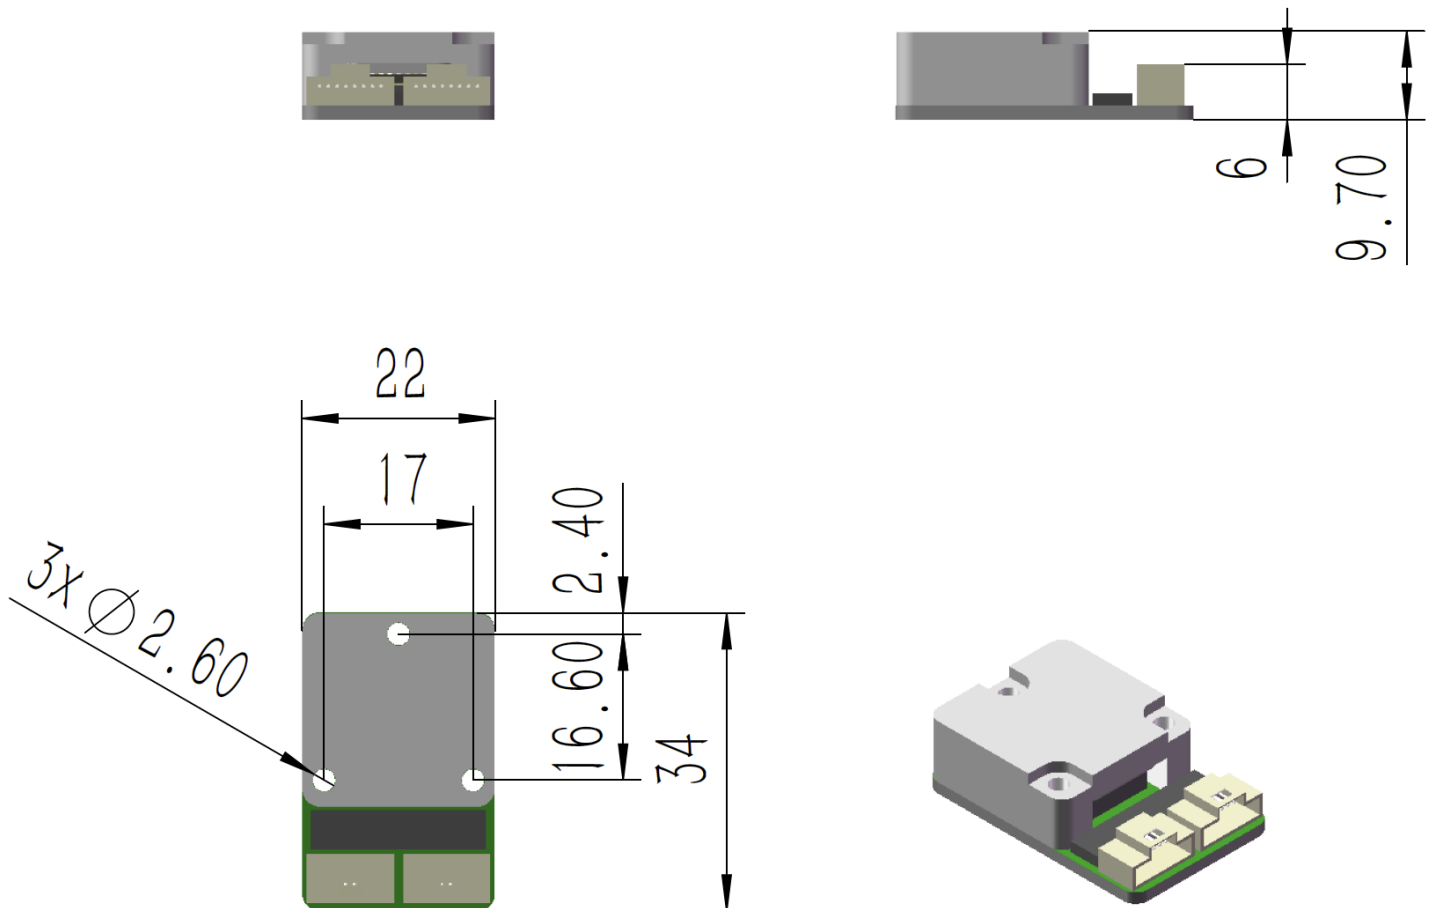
EVAL HI12XX-MI1-100 mechanical dimension
